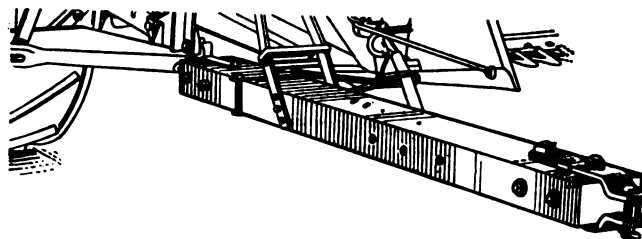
STUB TONGUE TRACTOR HITCH FOR ONE BINDER ALONE, SHOWING CLEVIS ON STUB TONGUE
